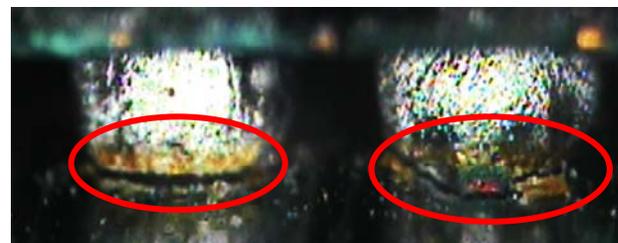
Pad lifting – PBGA676 (SAC305) – 200TS
